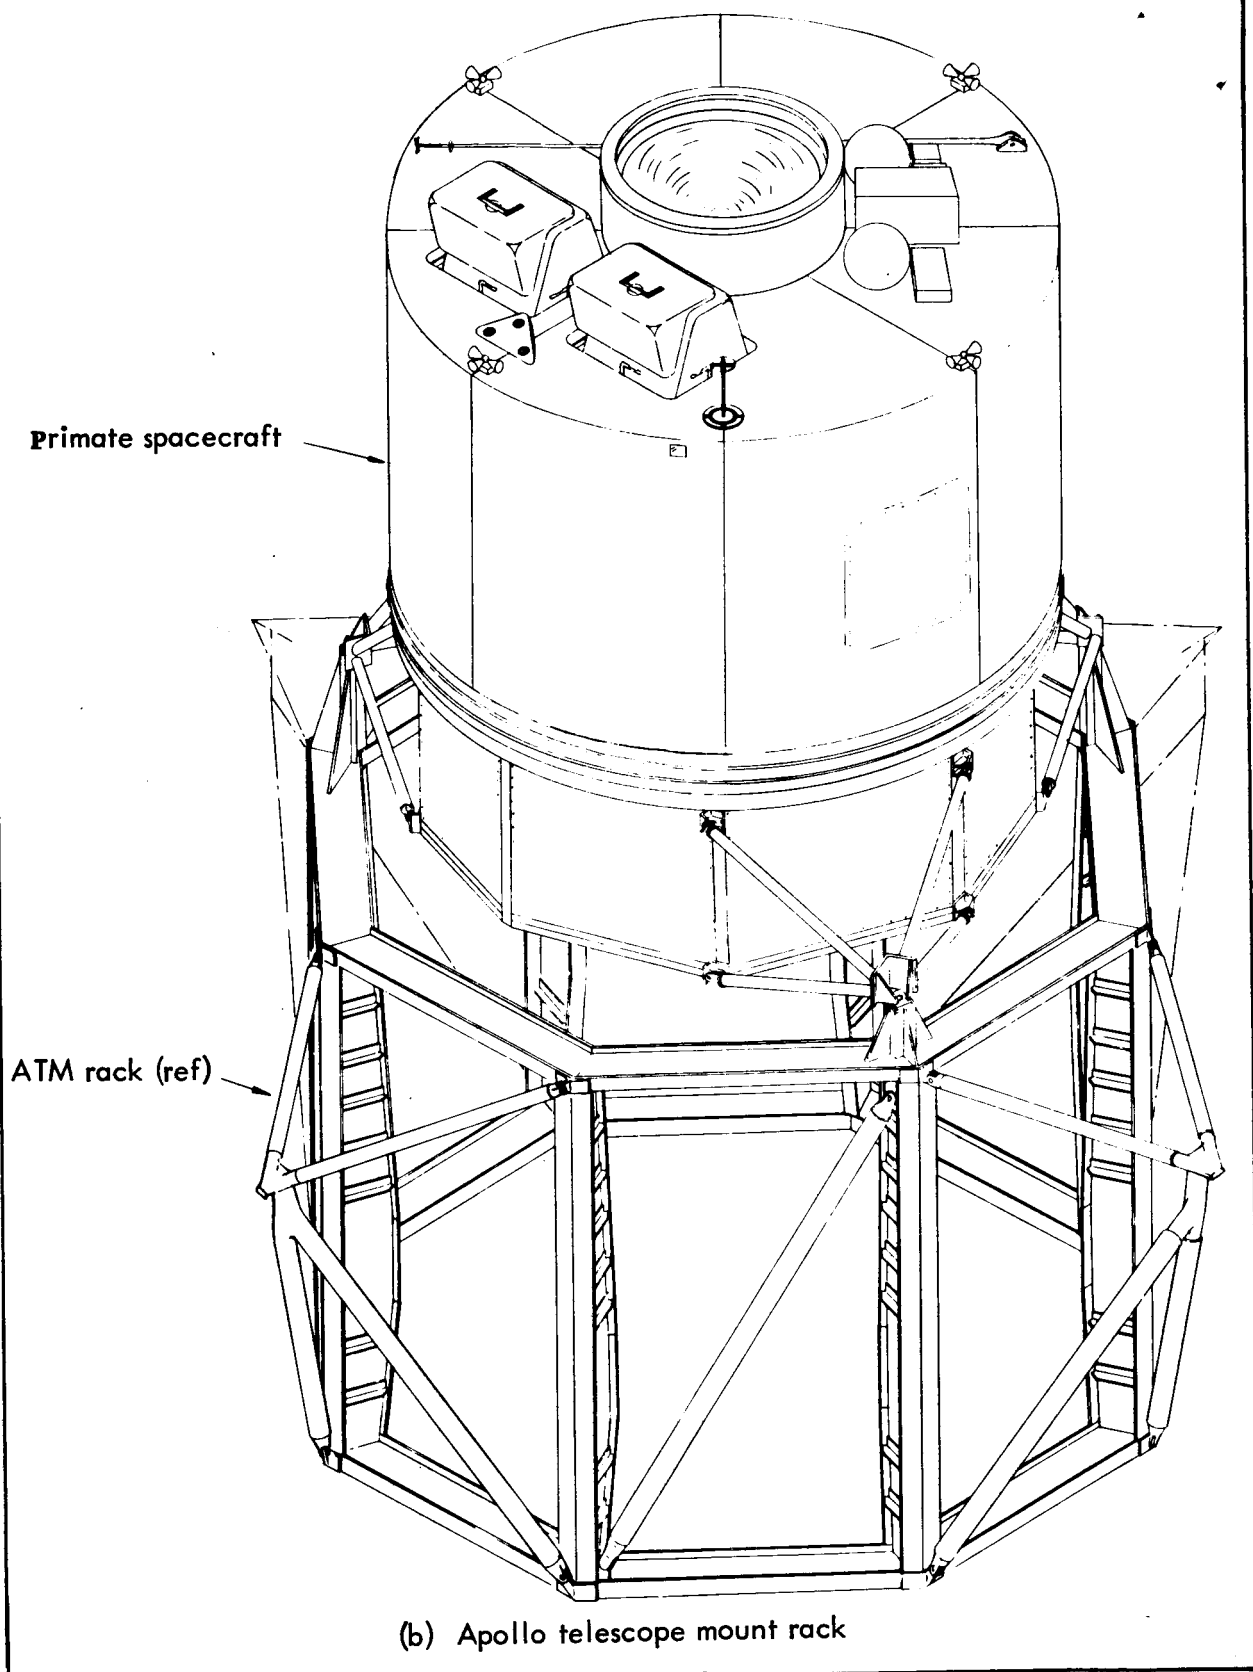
Top assembly and installation OPS launch vehicle (concluded)
